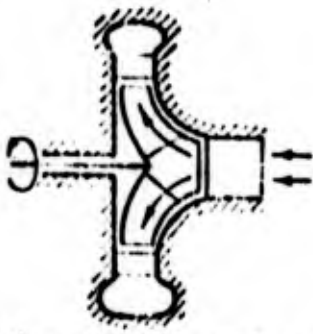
Diagram of a centrifugal radial vane machine.
